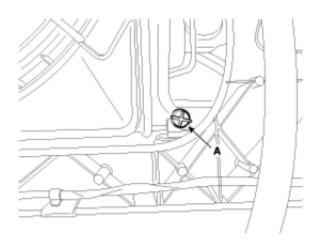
Identifying Drain Plug Courtesy of HYUNDAI MOTOR CO.
